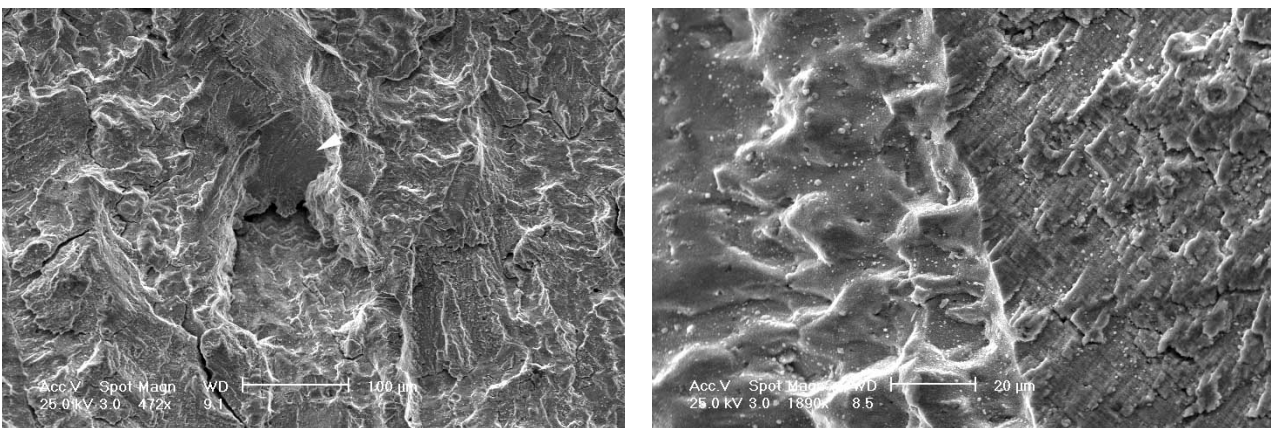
Ligaments on the fracture surface of specimen A152-TS-4: (a) out of plane crack and (b) interdendritic (left) and TG (right) fracture modes. Crack advance is from bottom to top.
